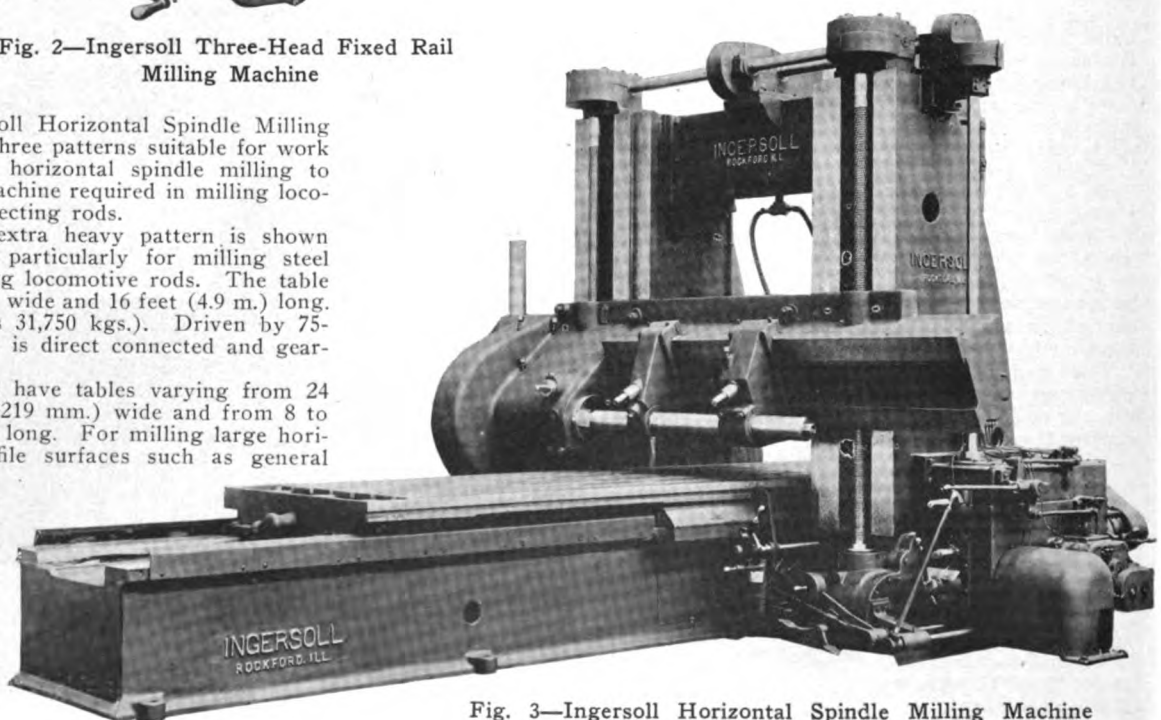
Ingersoll Horizontal Spindle Milling Machine
